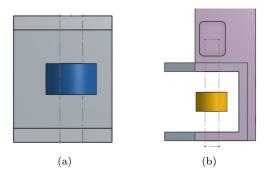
Views of upper and lower wishbone brackets. (a) Upper wishbone bracket with the relative placement of bearing. The gray-dotted sketch indicated the location of an M8 bolt, through the bracket and bearing acting as a shaft. (b) Lower wishbone bracket with the relative placement of bearing. The gray dotted sketch indicates teh location of M8 bolt, through the bracket and bearing acting as a shaft. The rectangular hole above the bracket, machined into the upright, provides access to secure a bolt onto the M8 bolt.
